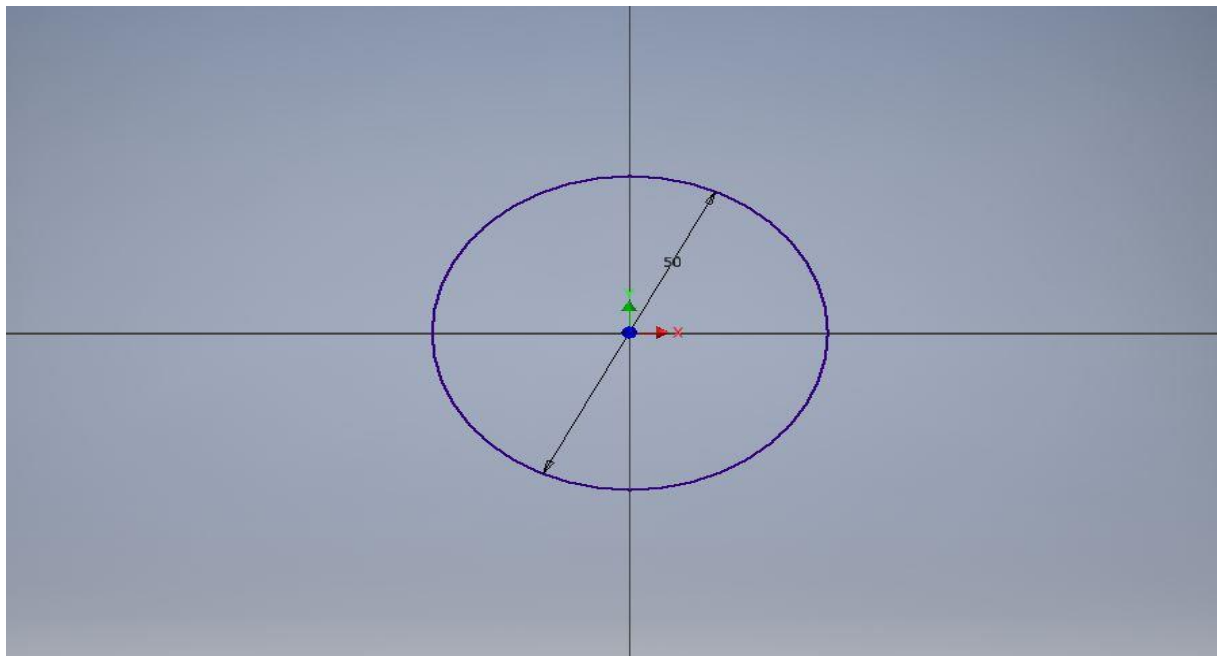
The first circle of 50 mm in dimension, representing the outlet of the first chamber 1 drawn on the XY plane.
